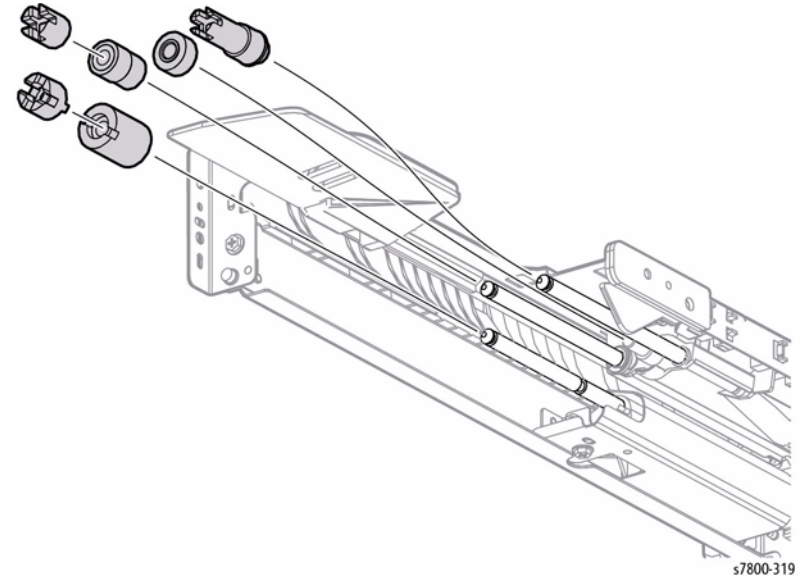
Installing Tray 2 Feed Roll/ Nudger Roll/ Retard Roll
